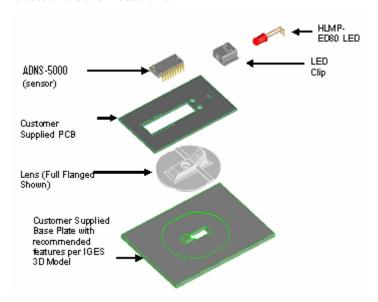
Exploded view drawing of optical tracking engine with ADNS-5000 optical mouse sensor.
